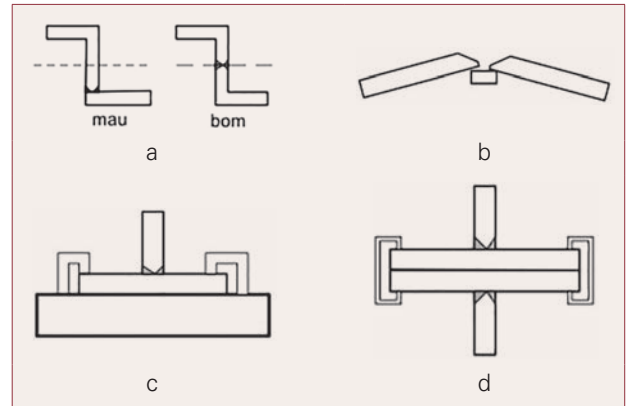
a) Welding placed next to the neutral axis of the structure; b) Introduction in the pieces of previous deformation contrary to the deformation of welding; c) Fixing the parts to a rigid support; d) Joint attachment of two pieces.
